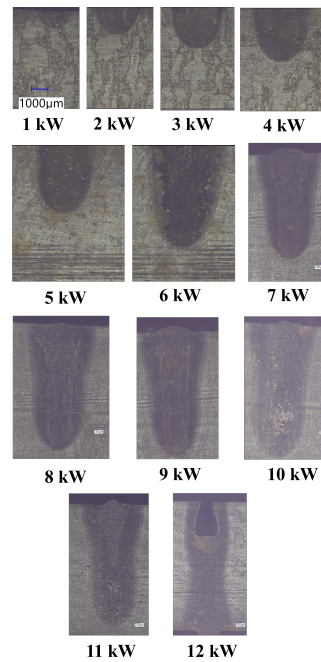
Macro of bead-on-plate laser welds with laser power ranging from 1 to 12 kW at a travel speed of 0.8 m/min.
